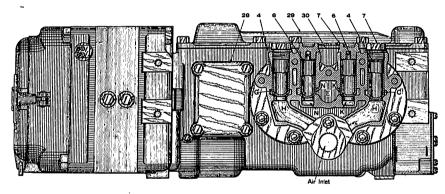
Type DH Compressor with Cylinder Cover in Section
